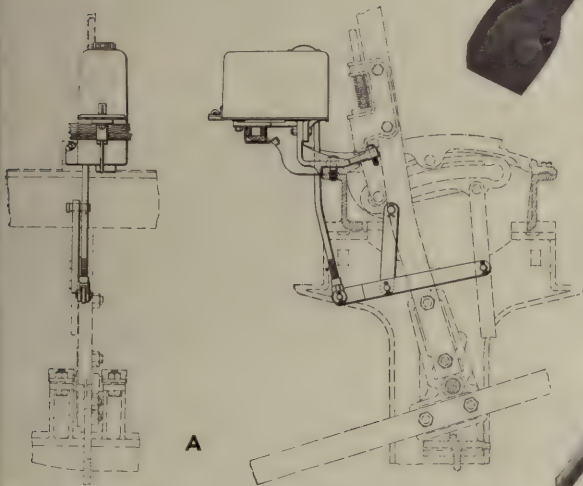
Model 7 Electric Lock Applied to Johnson No. 2 Interlocking Machine. The Union Switch & Signal Company.
